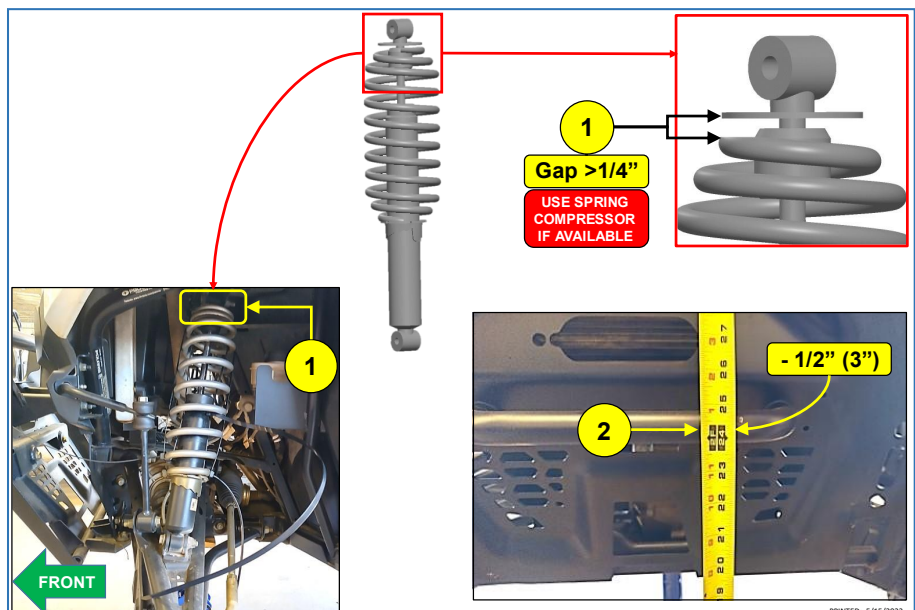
TIP.9 Checking Gap at top of Front Coil Springs using Zip-Ties
